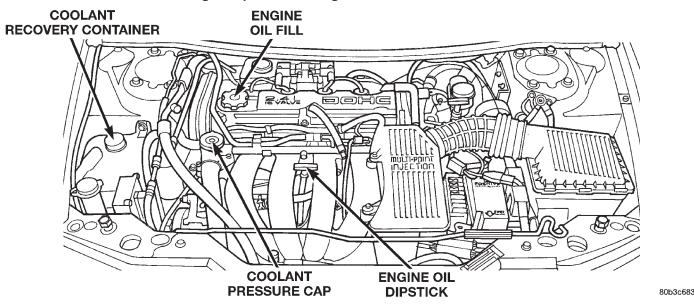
Dipstick and Engine Oil Fill Locations—2.4L
